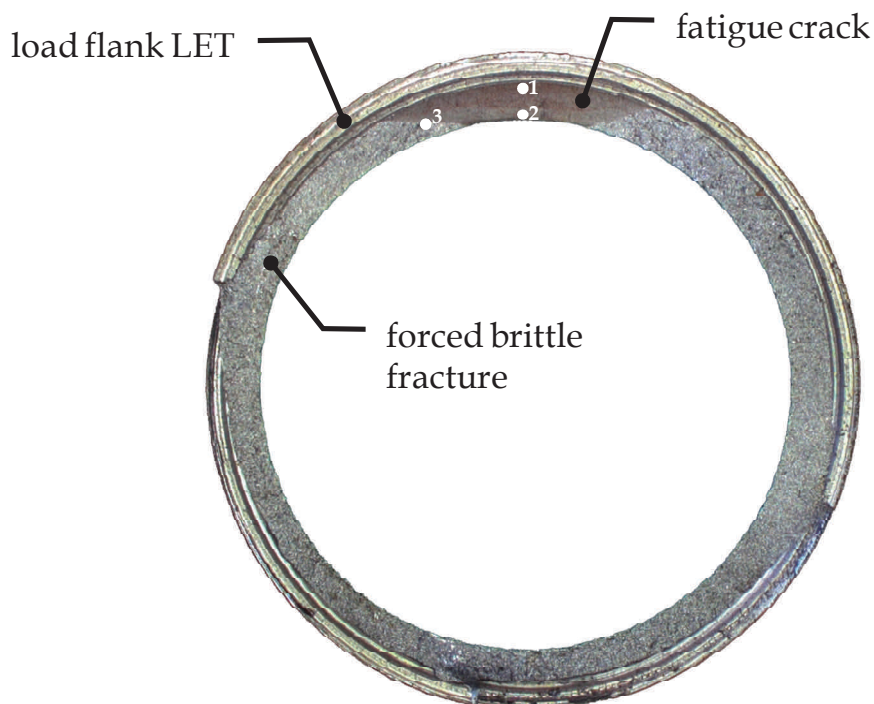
Fracture surface of a modified 1" API Line Pipe specimen with a box wall thickness reduction of 1 mm.
